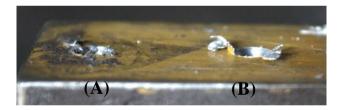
Burrs formed in D2 (A) Non-Uniform Burr (B) Transient Burr
